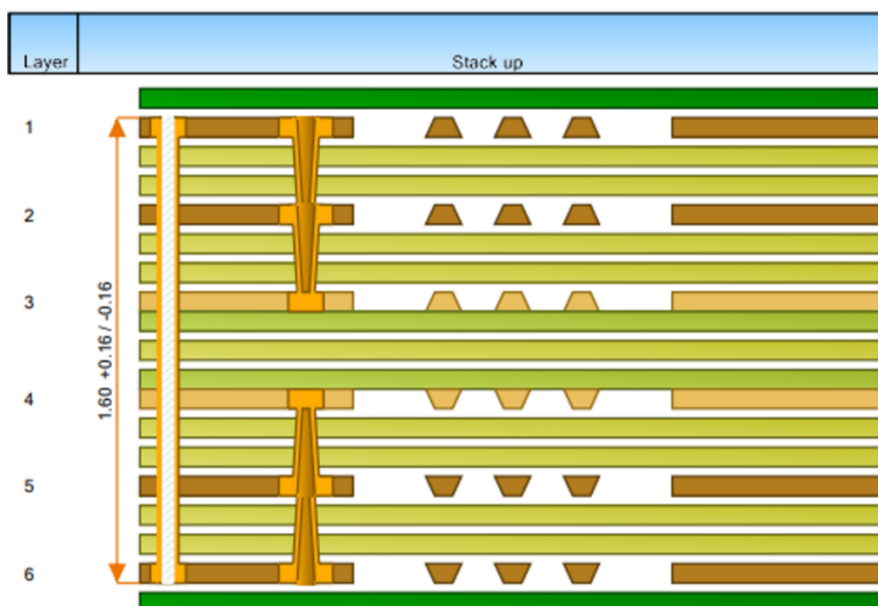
Via definitions for the test PCB showing thru hole plated via and stacked microvias used in the design.
